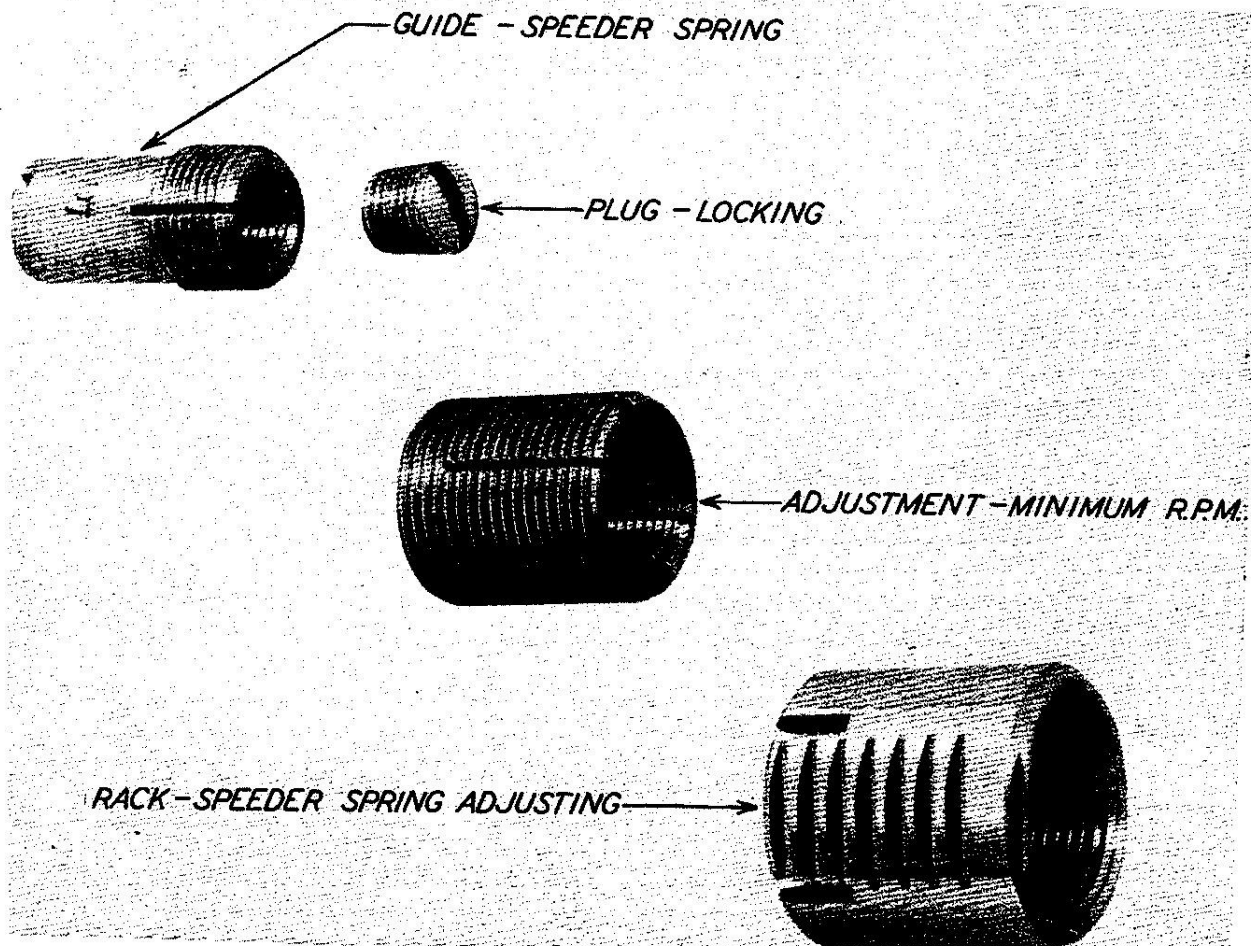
RACK ASSEMBLY SPEEDER SPRING ADJUSTING
